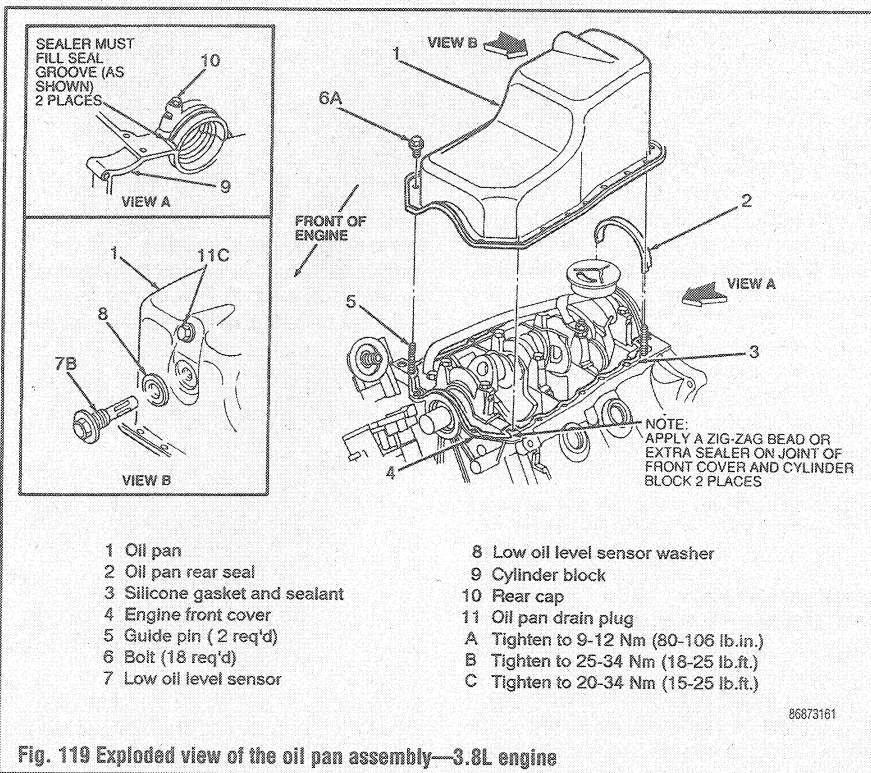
Exploded view of the oil pan assembly—3.8L engine
